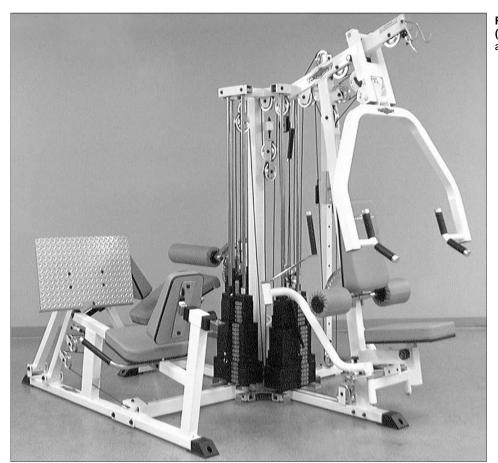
Before assembling the Weight Shields (#50 & #51), inspect and adjust the cables to ensure a safe and smooth operation.
